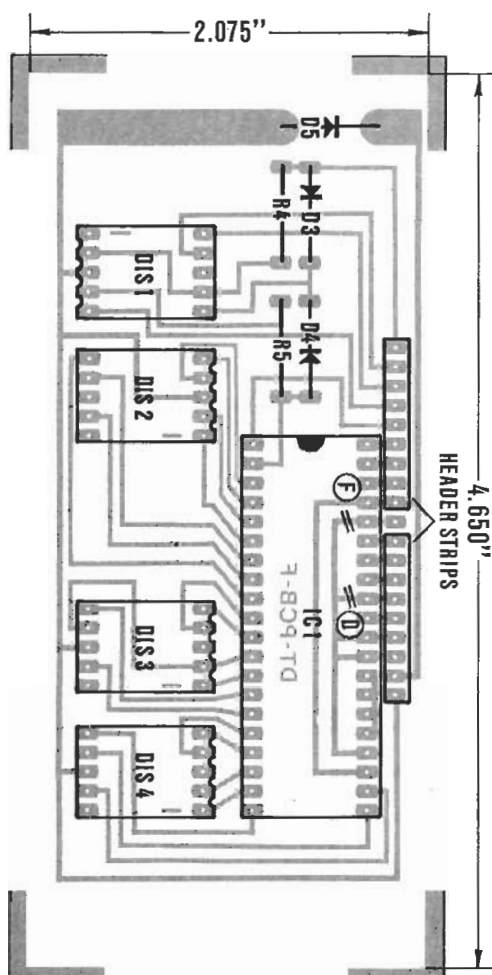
THE CLOCK IC, four displays and five other components are on the front PC board.
